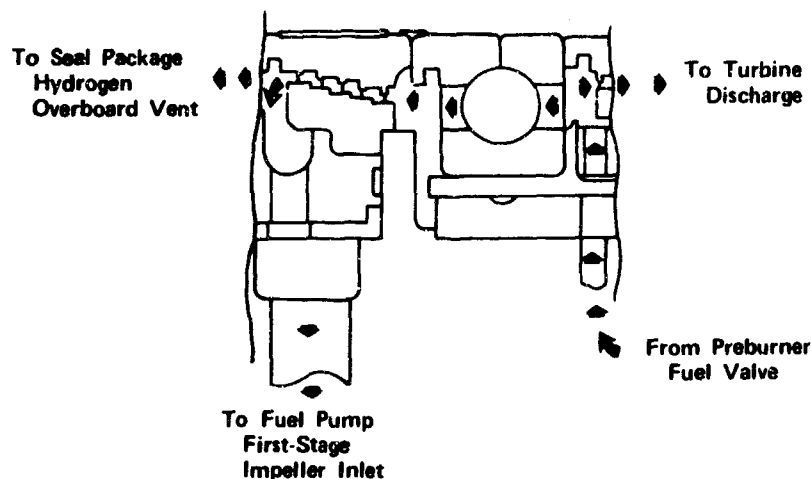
Oxidizer Turbopump Rear Bearing Coolant Flow
